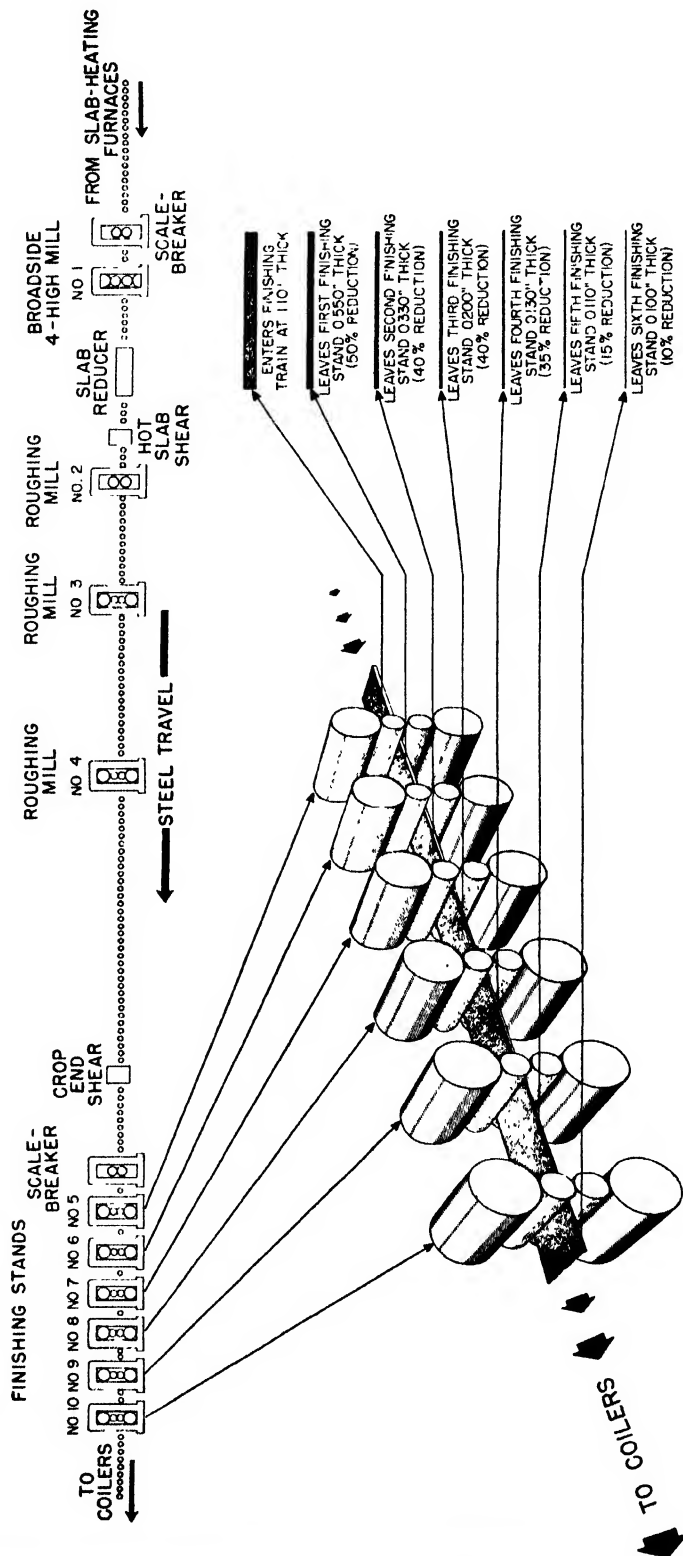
Typical reductions per pass in the finishing stands of a hot-strip rolling mill.
